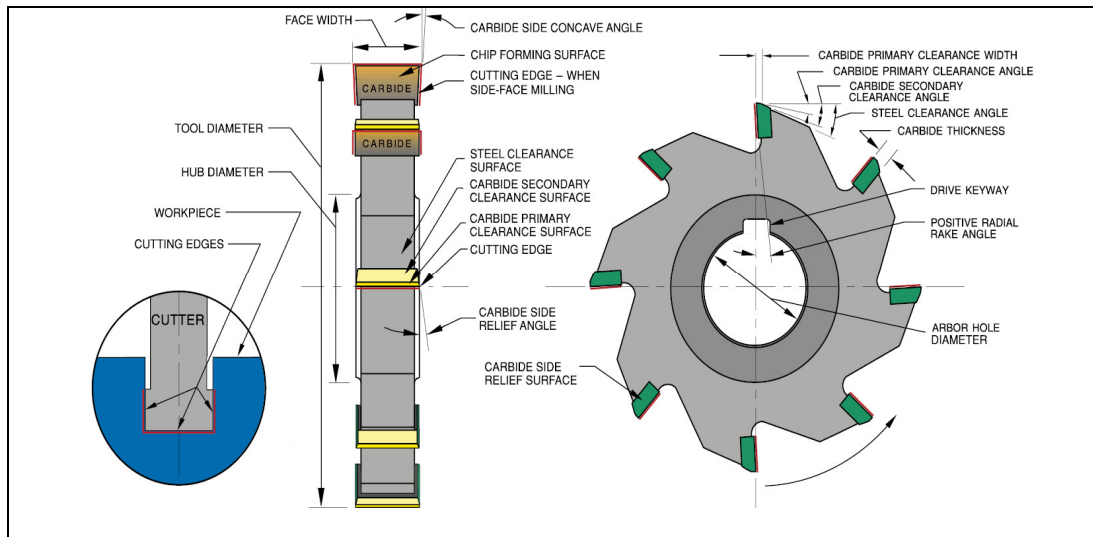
Slotting blade nomenclature, geometry and cutter surface (www.steelcuttingtoolspeedsandfeeds.com 2010).
